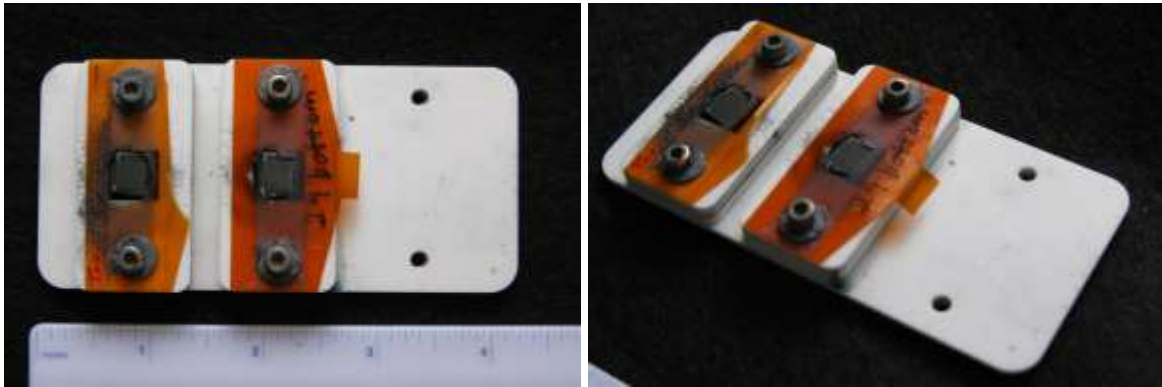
Final assembly of the fixture. These two images were taken after spraying.
